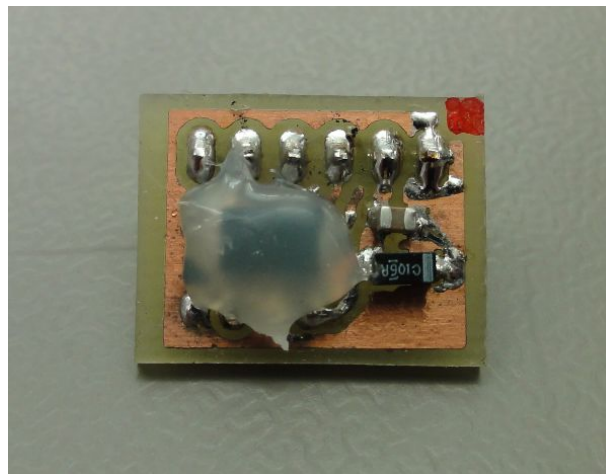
The prototype PCB of the MMA7455L adapter board. The MMA7455L IC is casted in hot glue for mechanical protection.
